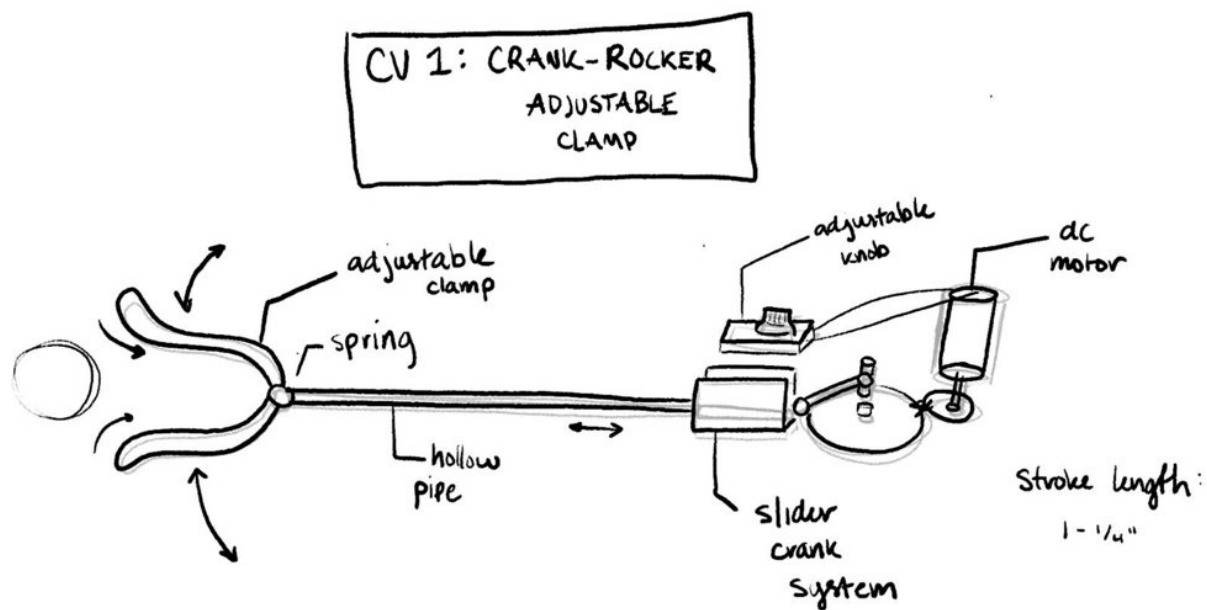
Spring-Loaded Clamp Slider-Crank – Adjustable Knob
